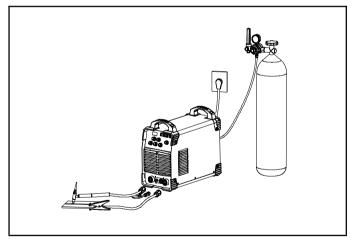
HF Arc Ignition or Lift-arc TIG Welding Sketch Map
